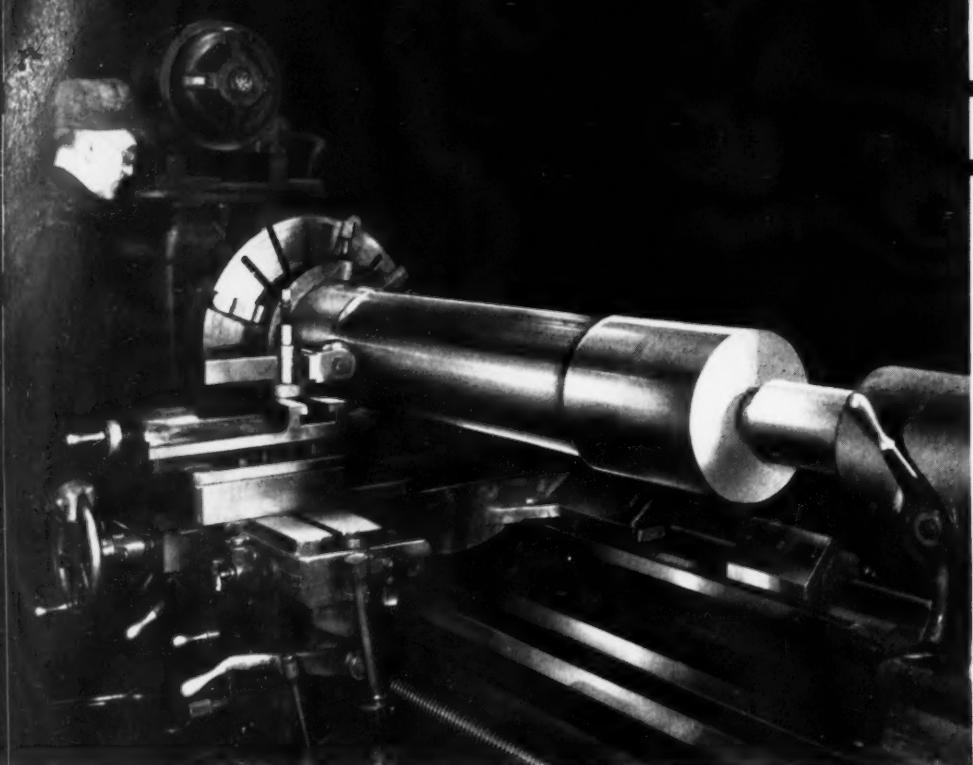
(Left) Burnishing a Locomotive Axle to Remove Tool Marks and Eliminate Danger of Fractures
